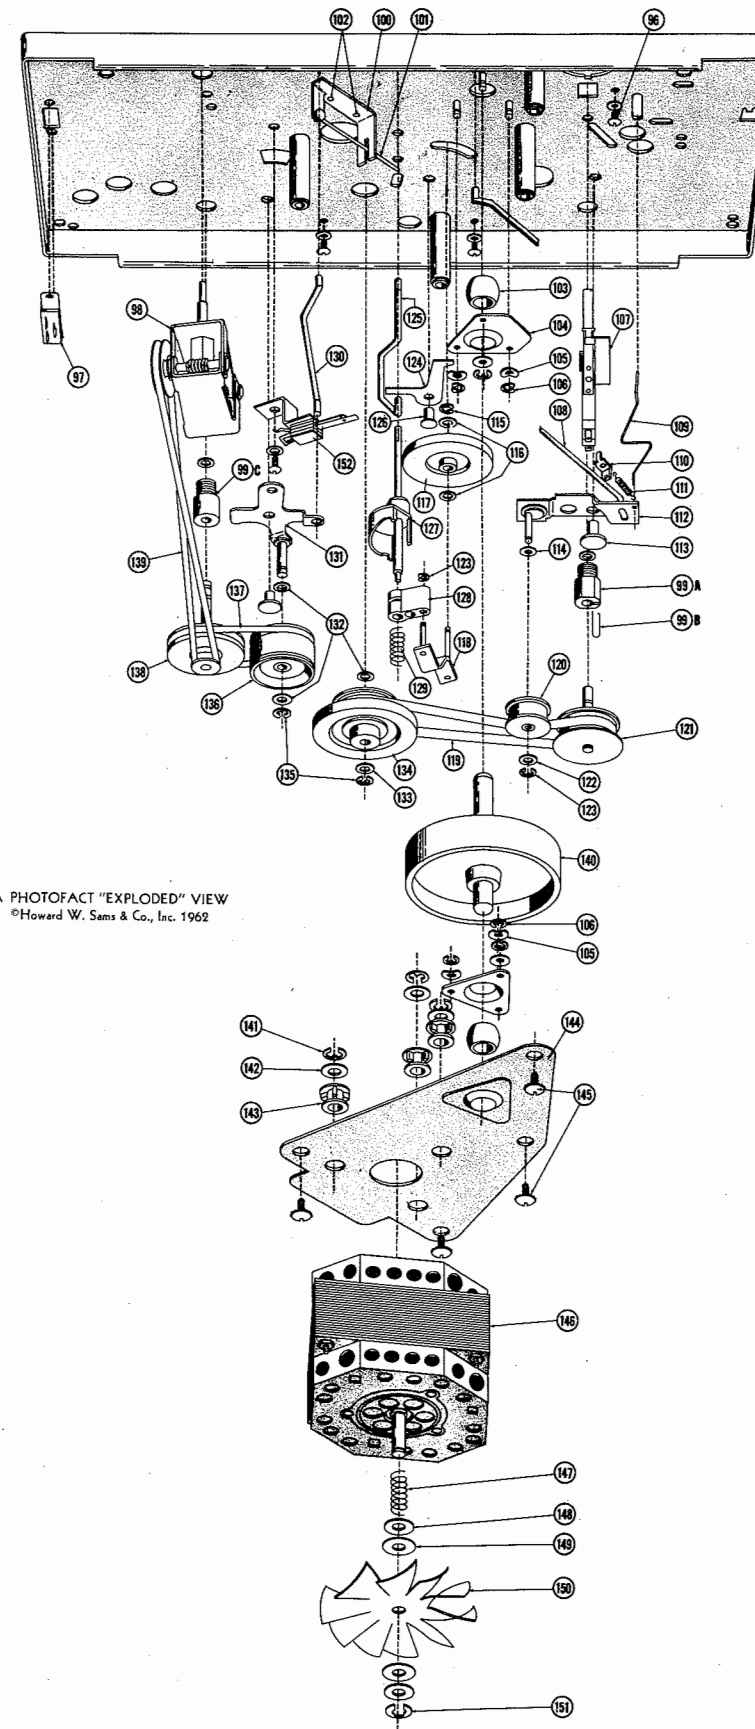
B. Exploded View of Tape Transport Assembly Below Base Plate.
